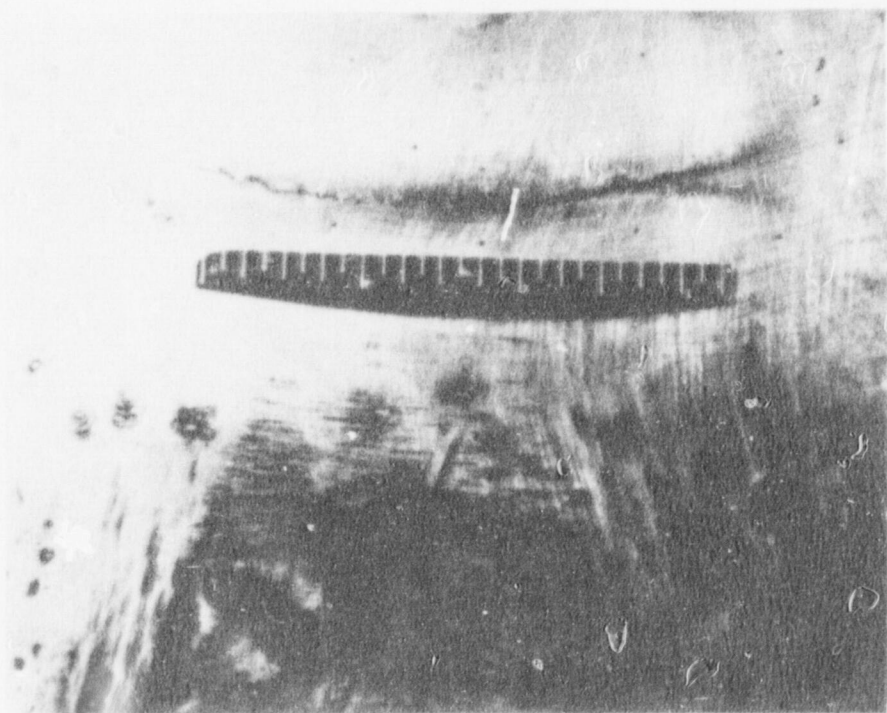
VIEW OF FATIGUE CRACK ON THE OUTSIDE
